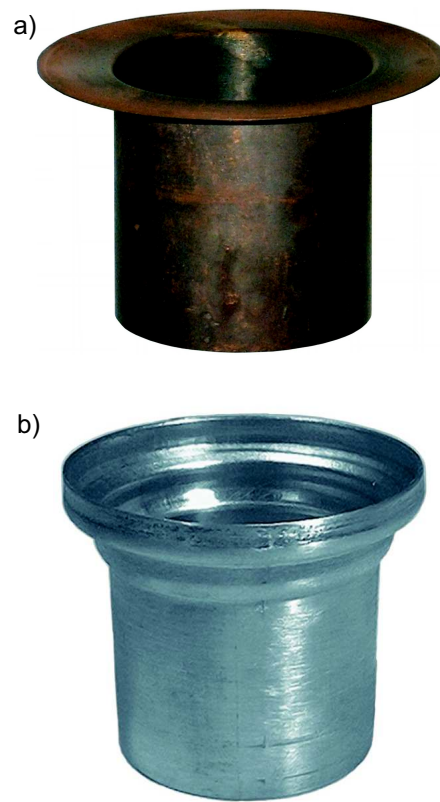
Electrodynamic forming of flange (a) and socket (b) at pipe end using expanding inductor
